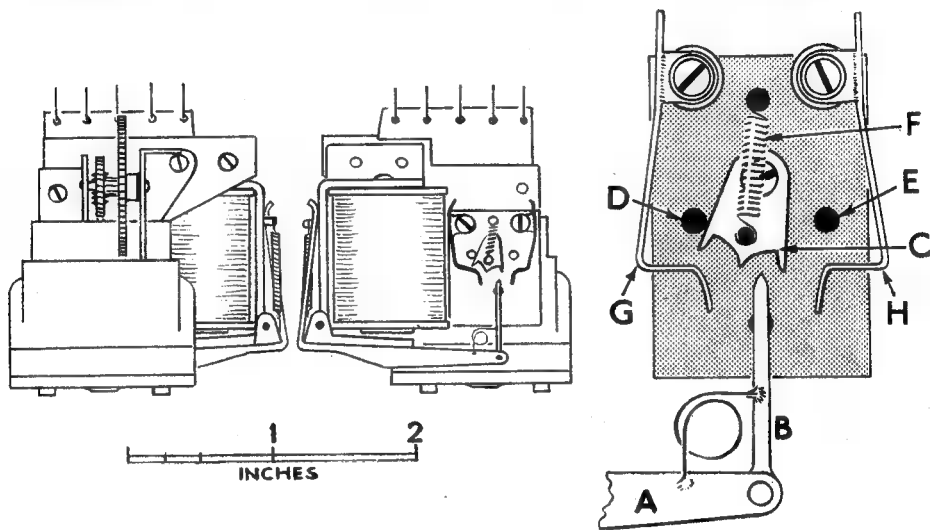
Self-contained selector and steering unit, front and back view. Right—enlarged view of selector mechanism
